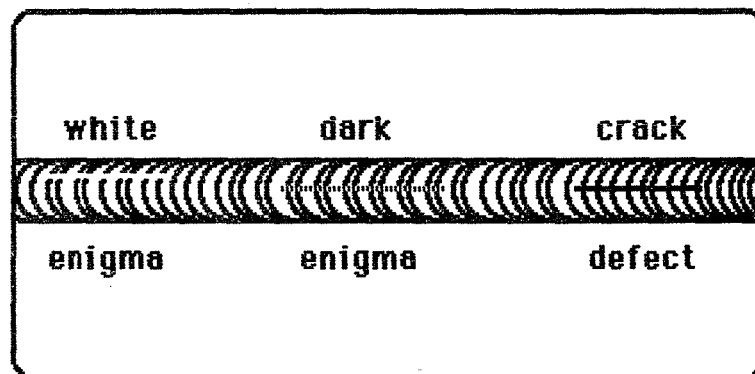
The typical appearance of enigmas and crack indications in a weld radiograph.
